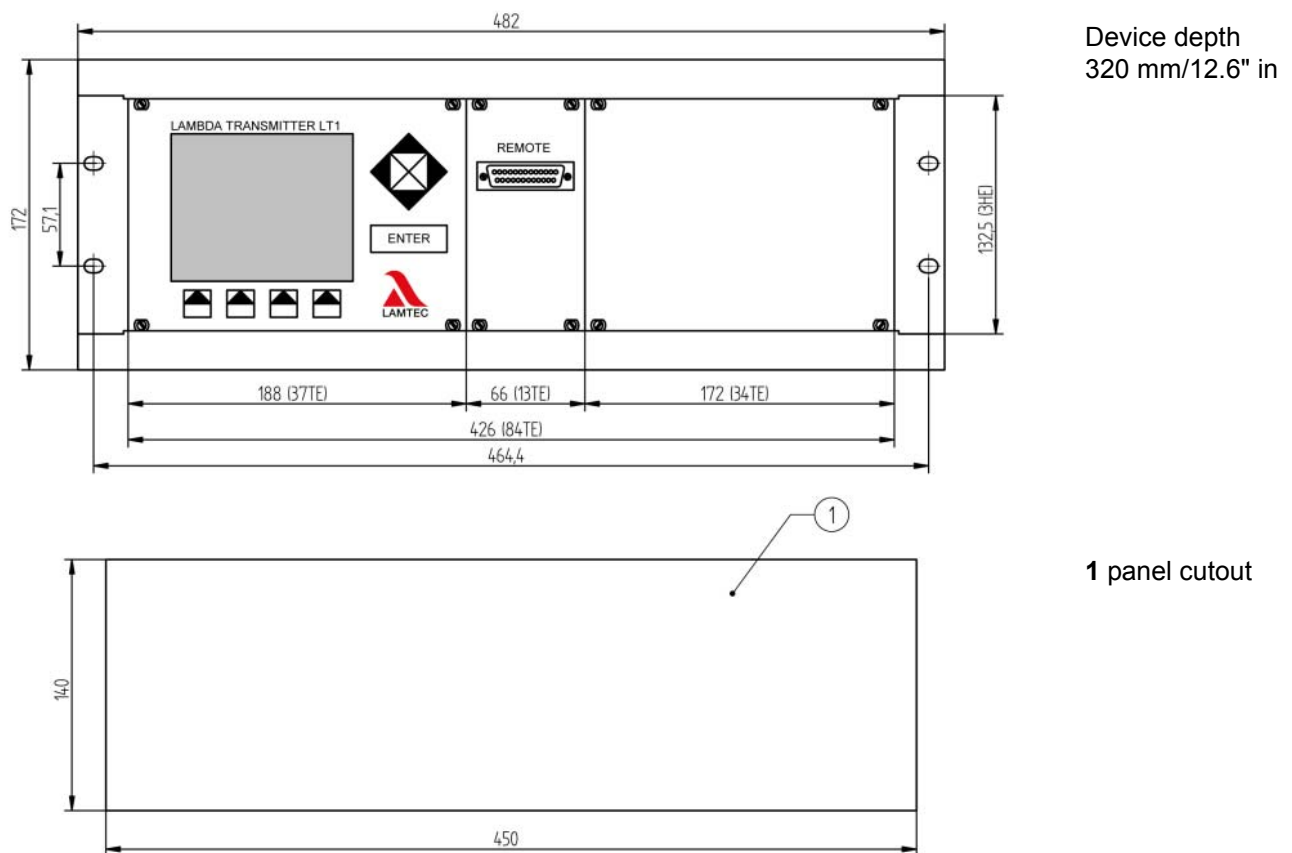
Dimensional drawing LT1 type 657R004 19"-housing with display and operating unit
